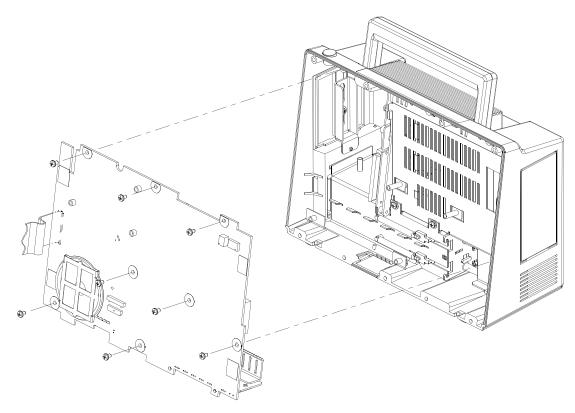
Chassis assembly for Ultraview 1030/1050
